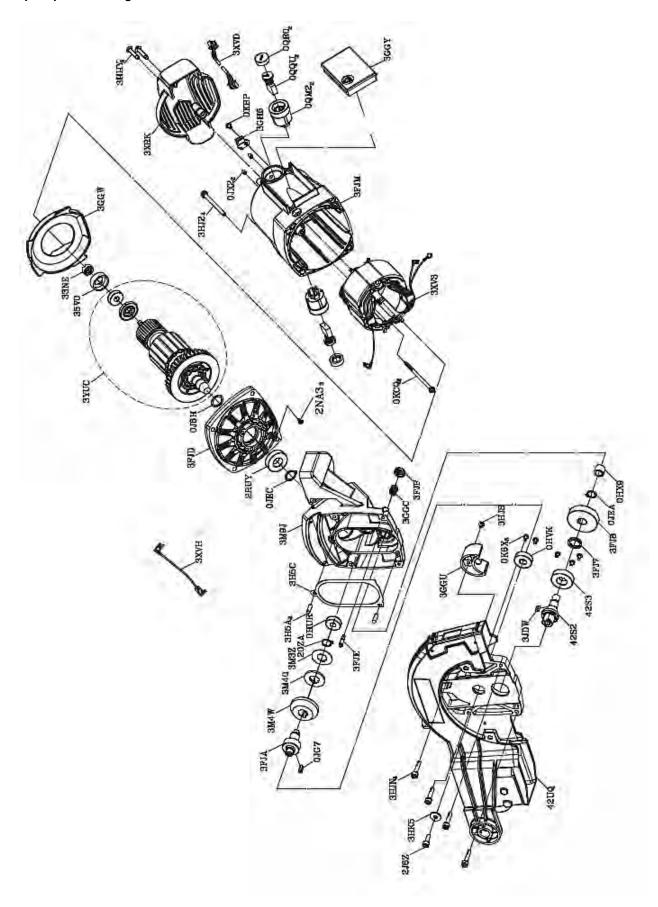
Spare parts drawing 2 KGZ 2540 VARIO
